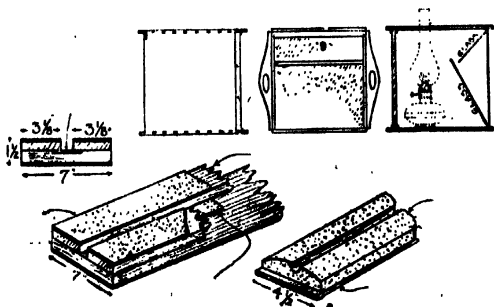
MOTH-TRAP AND MOUNTING-BOARDS.
